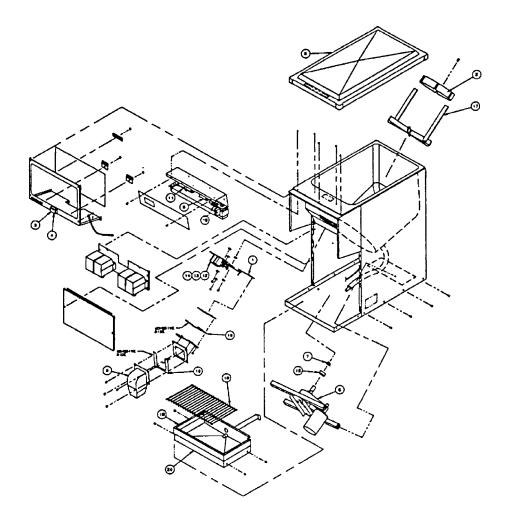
EXPLODED VIEW & PART LIST DB90-B
